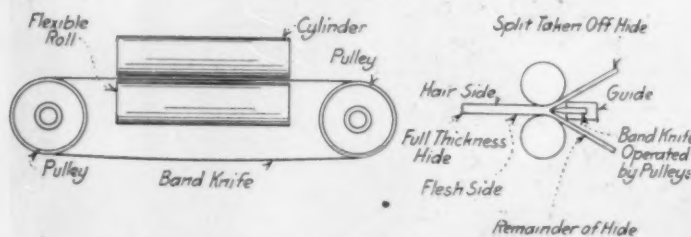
THE ROLLS OF THE SPLITTING MACHINE
